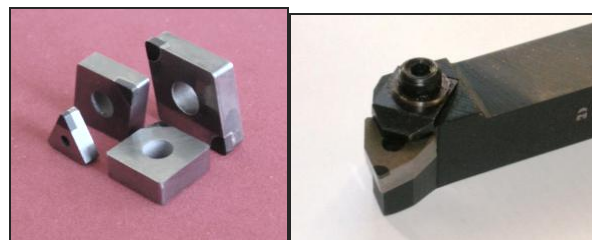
Multifaceted carbide plates with soldered cutting elements from "Belanit" and the type of cutter with mechanical fastening.
